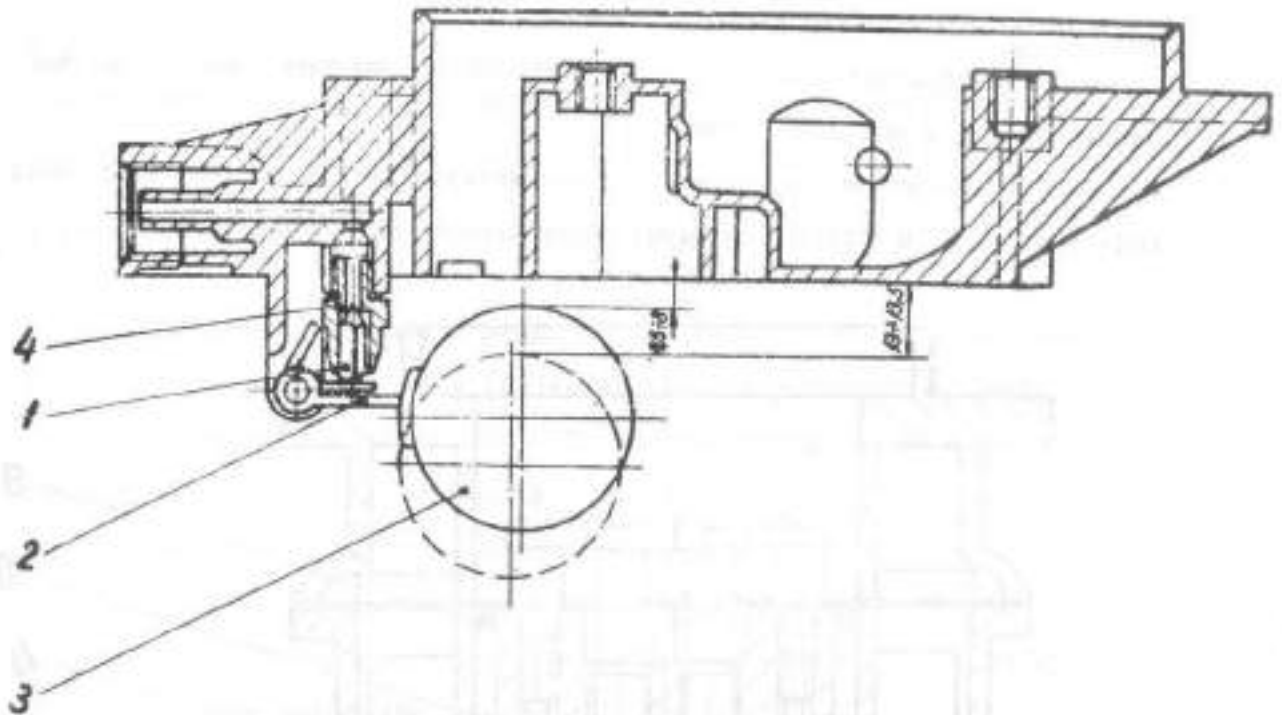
CARBURETTOR UPPER BODY WITH FUEL CONSTANT LEVEL MAINTAINING MECHANISM
